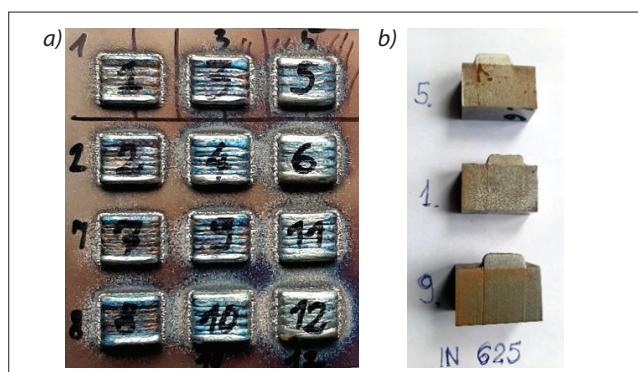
a) Samples clad with IN625 powder on WCL tool steel, b) cross-section
